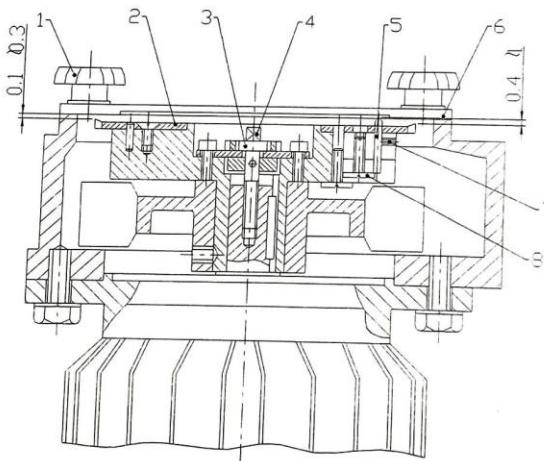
Adjusting Milling Cutter Height and Groove Depth
